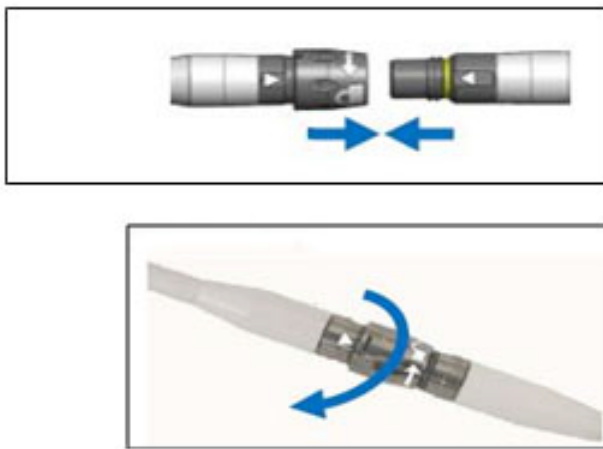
Pushing the In-Line Connectors Together and Rotating the Locking Nut
